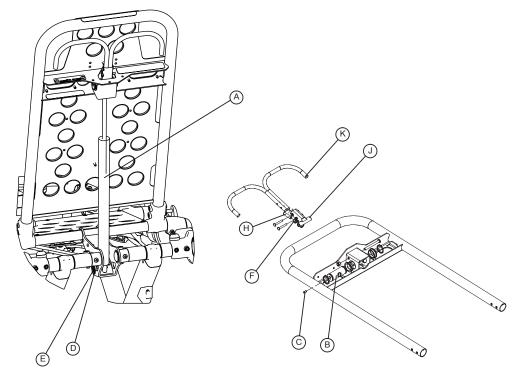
Pneumatic Cylinder and Fowler Cross Brace
